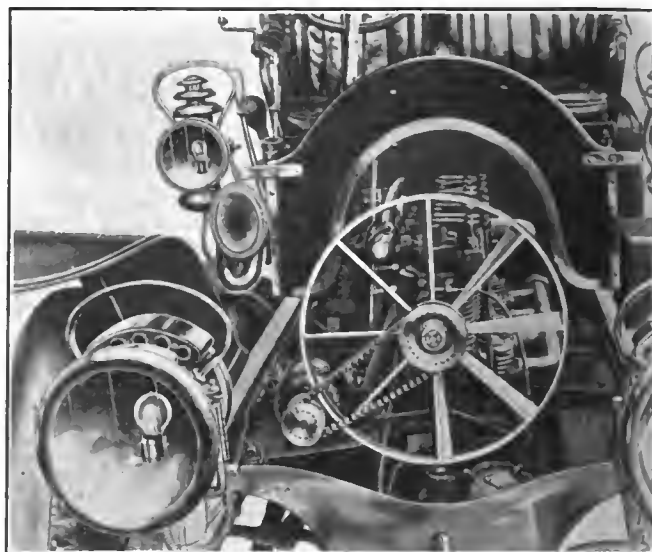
Lighting dynamo driven by a silent chain taking power from a pinion which is fixed upon the fan spindle
